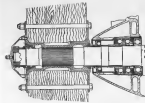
CROSS SECTION OF PROPELLER HUB AND MOUNTING
